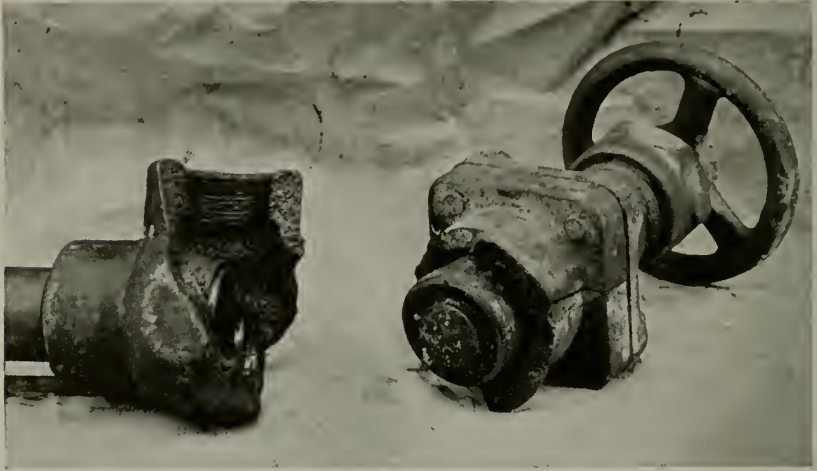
View of the broken by-pass valve which led to the violent explosion described on Page 203.
